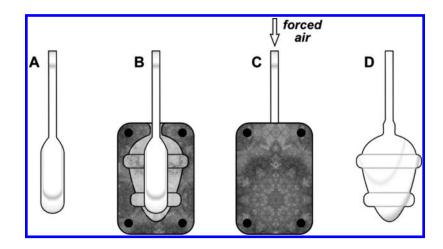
Blow-molding with a two-piece mold: : (A) hollow glass blank; (B) glass blank inserted into mold; (C) mold fashioned together and softened glass blown to fill mold; (D) mold disassembled and hollow vessel isolated.
